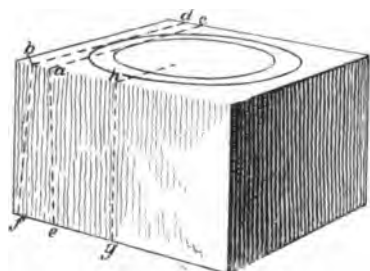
Block from Which the Pattern for a Rod Bushing Was Cut.
